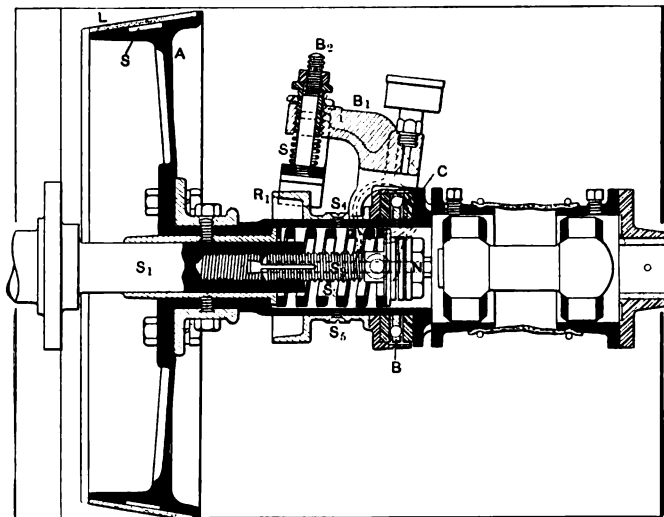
Detailed view of the National cone-type clutch and universal joint
